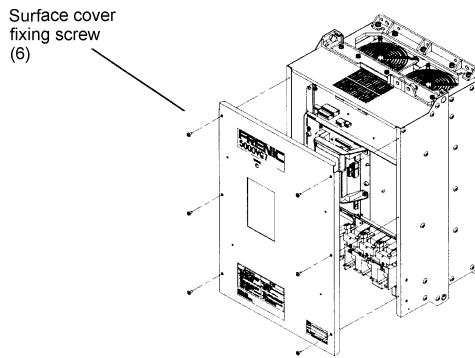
Removal of Surface Cover (18.5 kW or higher)
